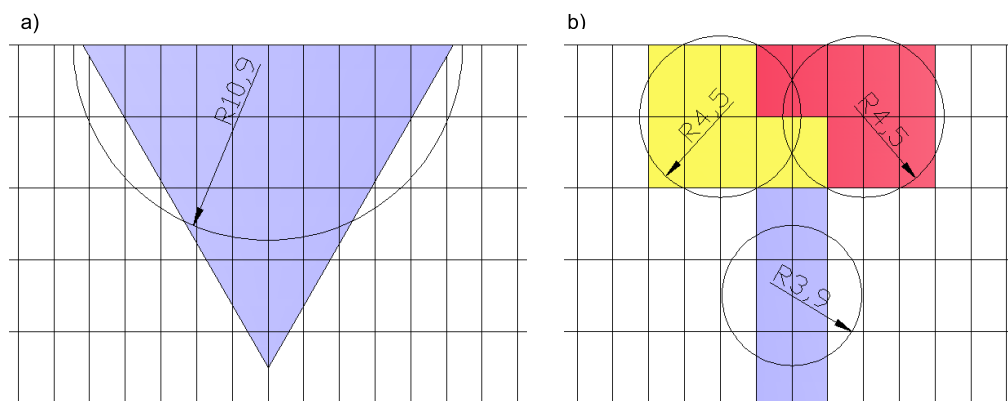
Heat source shape for the single-pass a) and multi-pass b) weld
